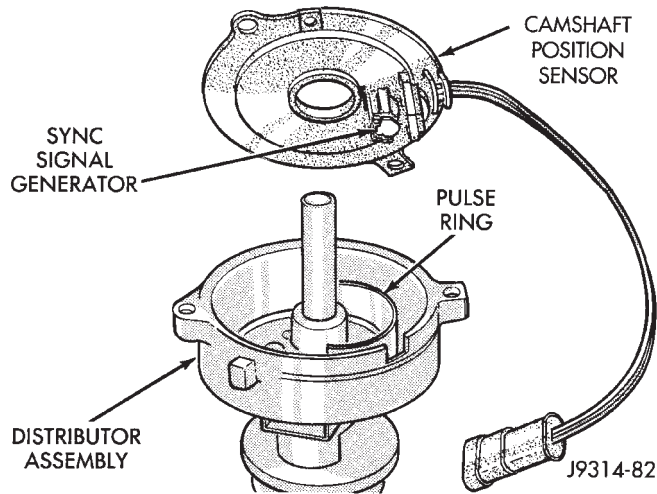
Camshaft Position Sensor—Typical(5.2L/5.9L Distributor Shown)
